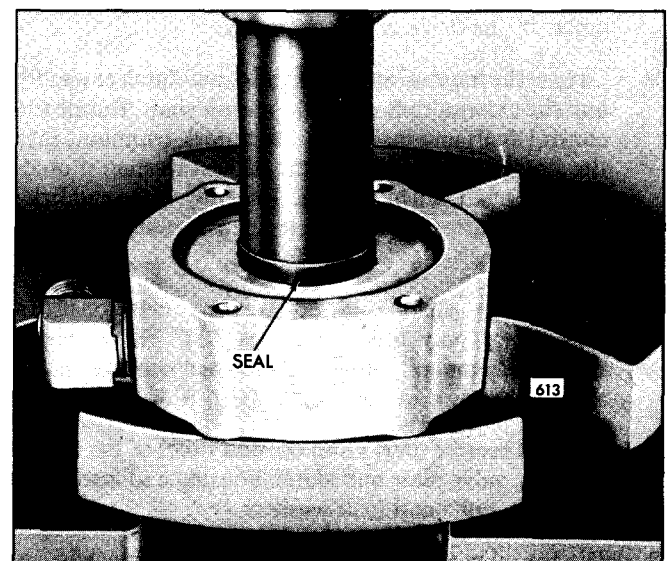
Installing Hydrostarter Shaft Seal in Valve Plate
